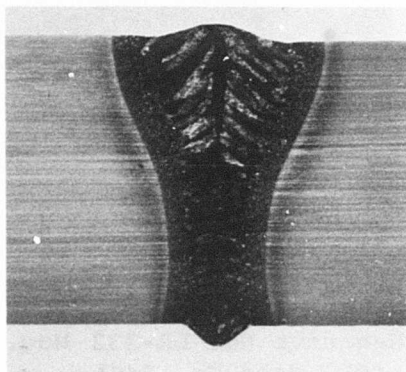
WELD CROSS SECTIONS (LOW ALLOY CARBON STEEL)
